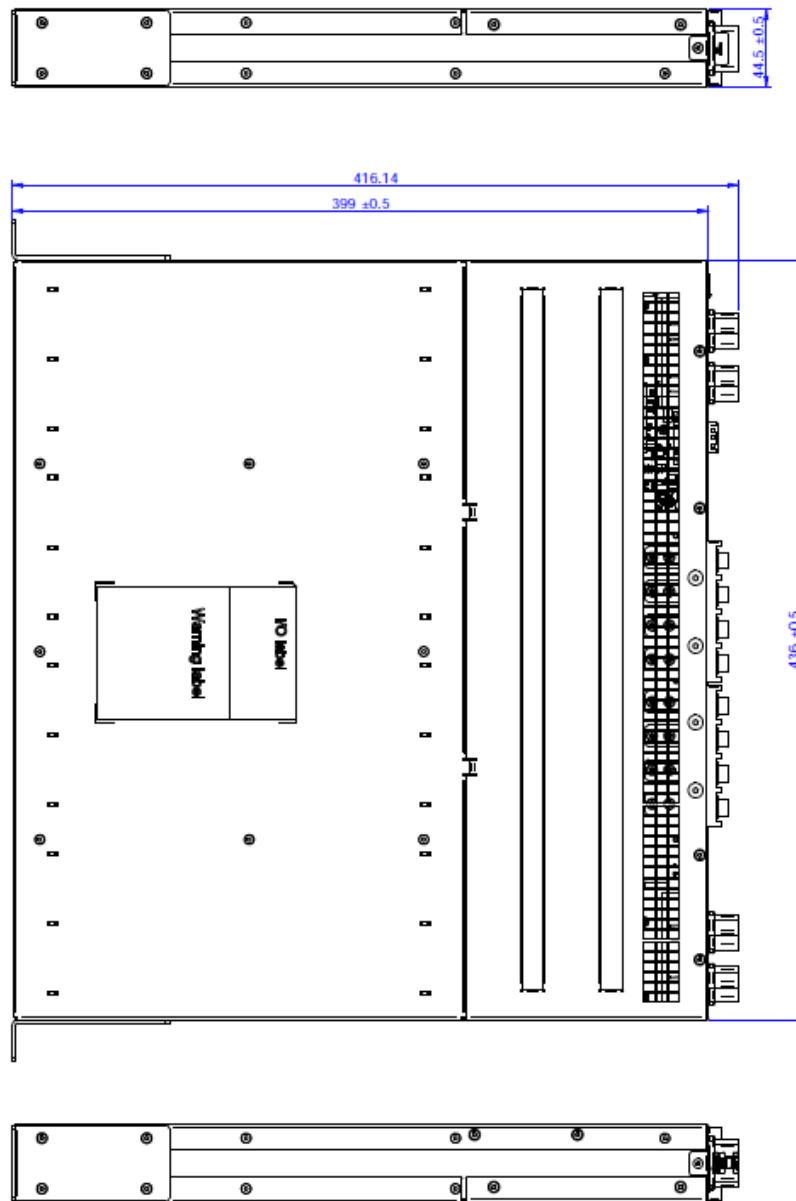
SPSTET3-02&SPSTET3-02N Mechanical Drawing with Dimensions (Front, Top, Side View)
